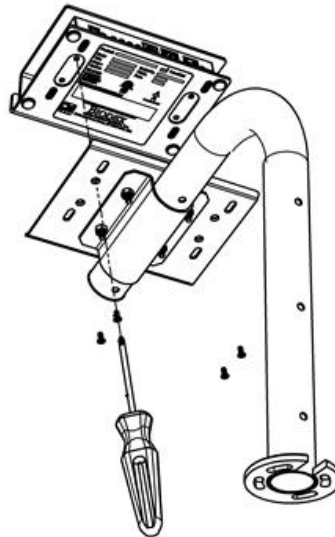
Attaching the Interface Module to the Tablet Shelf.
